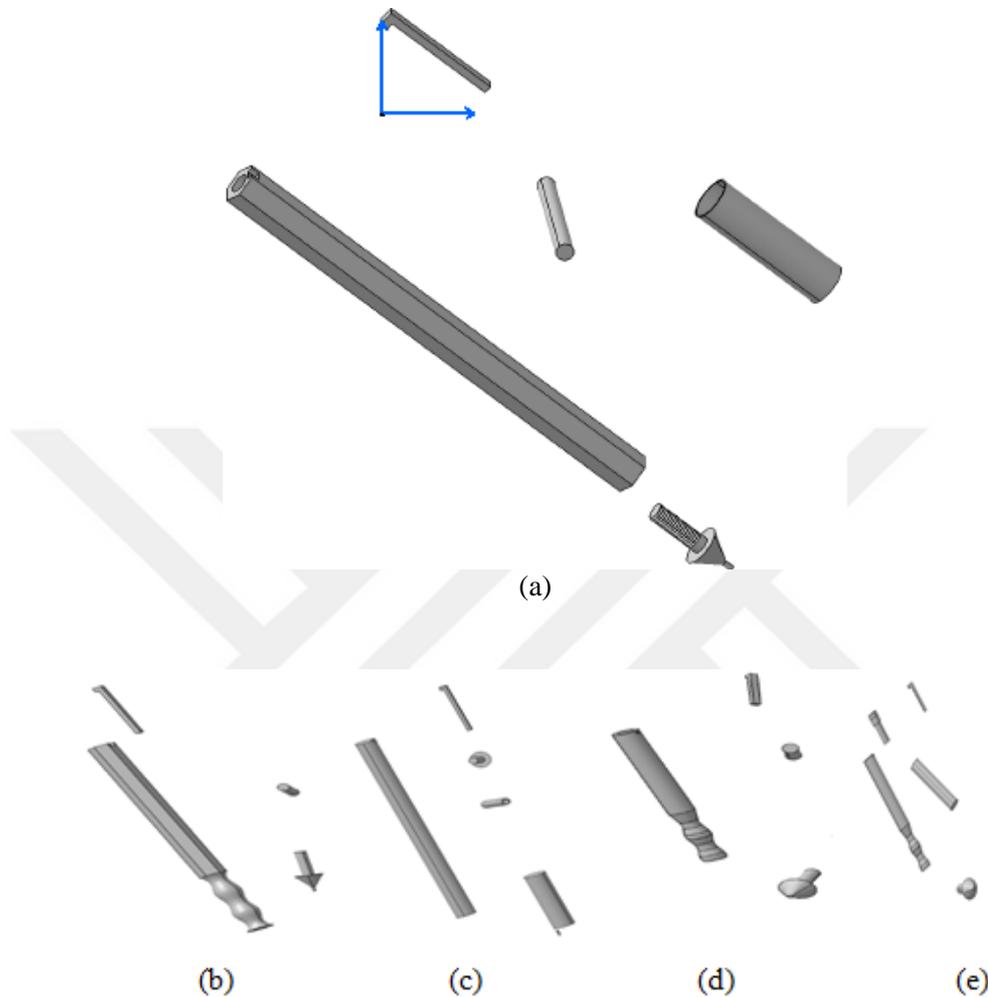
Assembly parts of (a) best mechanical pencil design alternative The second best (number 6 design alternative) (c) The third best (number 13 design alternative) (d) The fourth best (number 18 design alternative) (e) The fifth best (number 24 design alternative) design alternatives.
